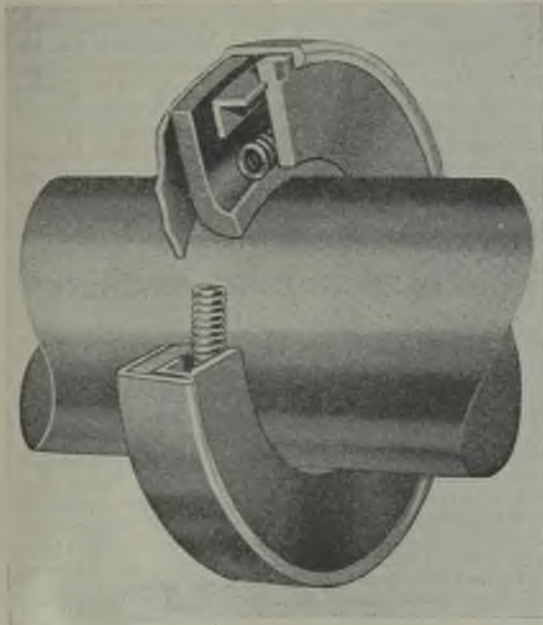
SECTION THROUGH STANDARD SEAL.
